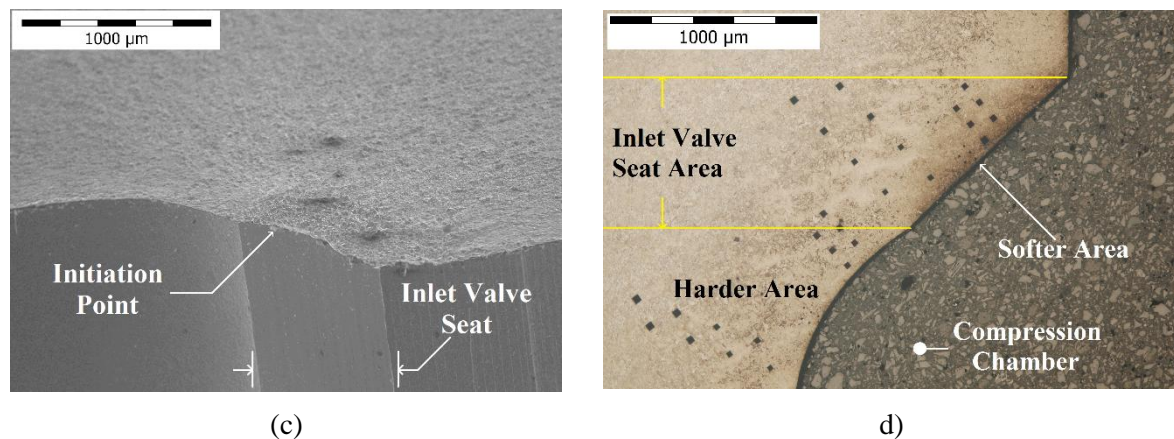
Hydraulic head failure due to inlet valve machining burn.
